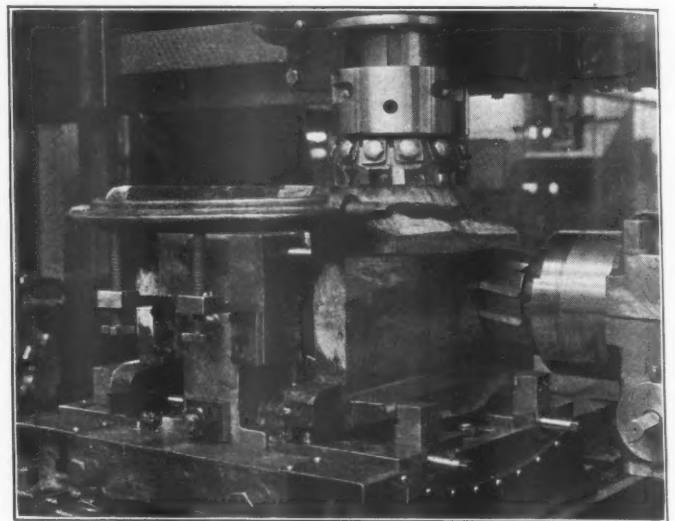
Special fixture for holding driving boxes while milling three sides simultaneously
